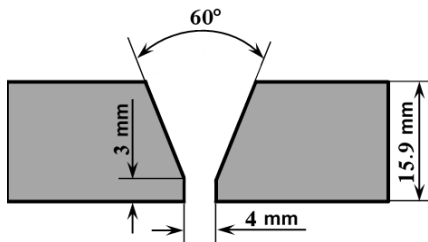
V-groove for butt welding from one side according to ISO 9692
